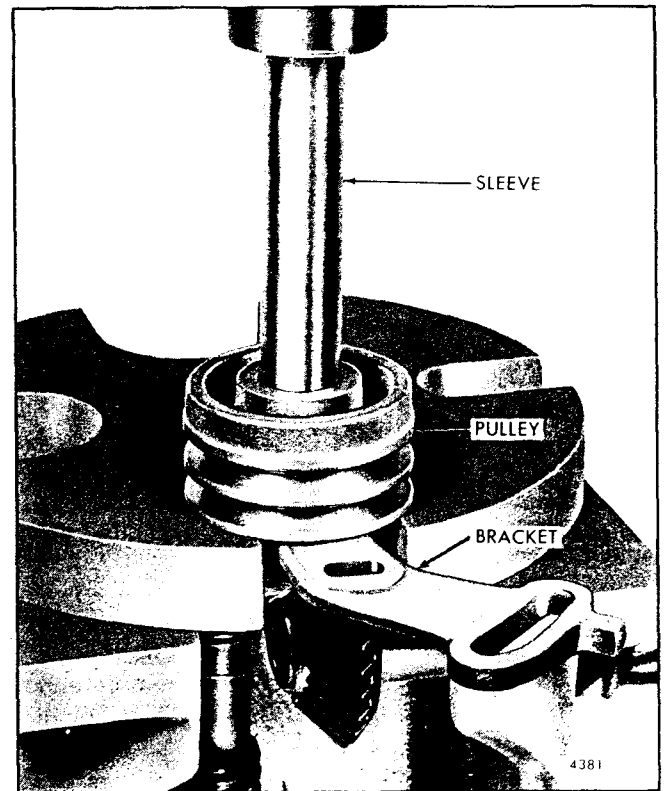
Removing Shaft and Bearing Assembly and Bracket from Idler Pulley
